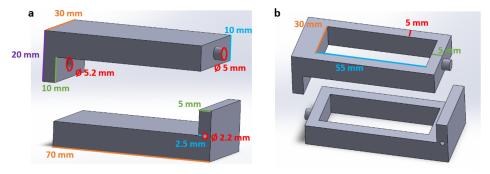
The two 3D printed test boxes; (a) the two L-shaped parts which are printed in PA12 using SLS and which had the vapor post-treatment; (b) the two L-shaped parts with open surface which will be printed in PA12 using SLS.
